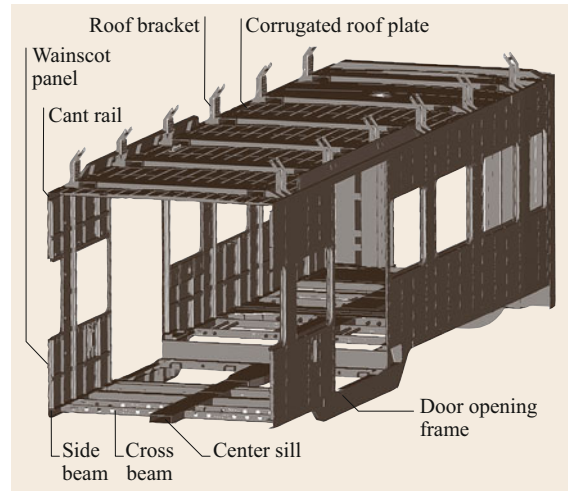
Sheet and stringer design in steel (FTD Fahrzeugtechnik Dessau AG)
